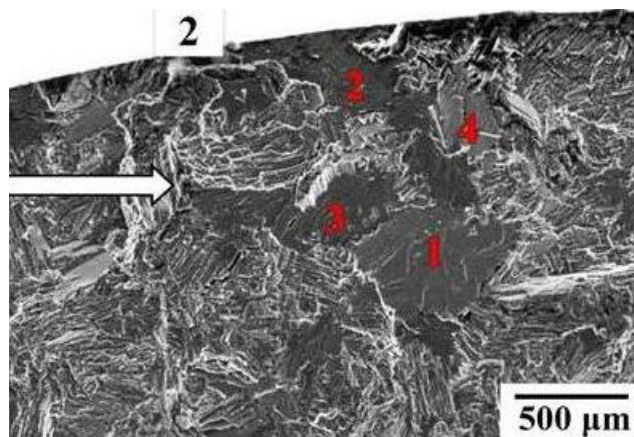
Fatigue cracks initiation area (modified)-low stress
